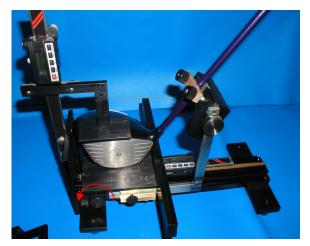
Rotate Clamping Assembly Knob until the Toe of Clubhead Rests Against Toe Plate
